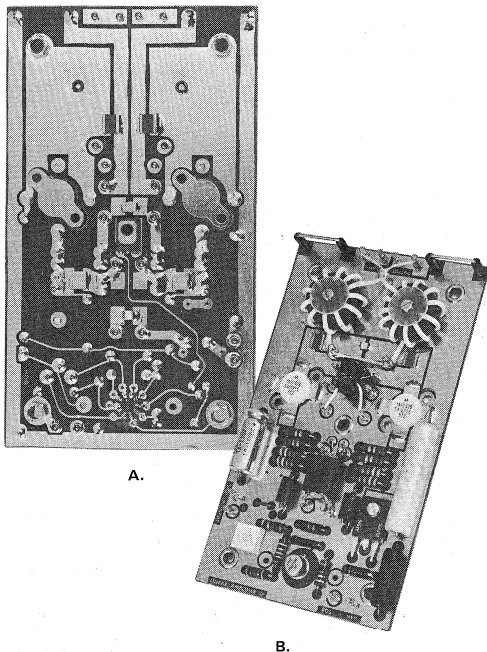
Bottom and Top of the 300 W Module Circuit Board
